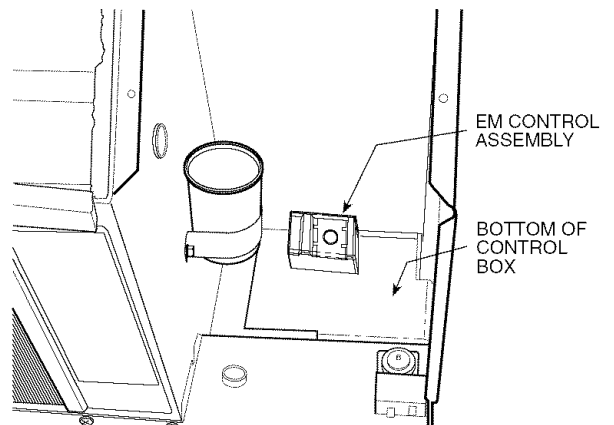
Location of EM Control Assembly on Bottom of Control Box
